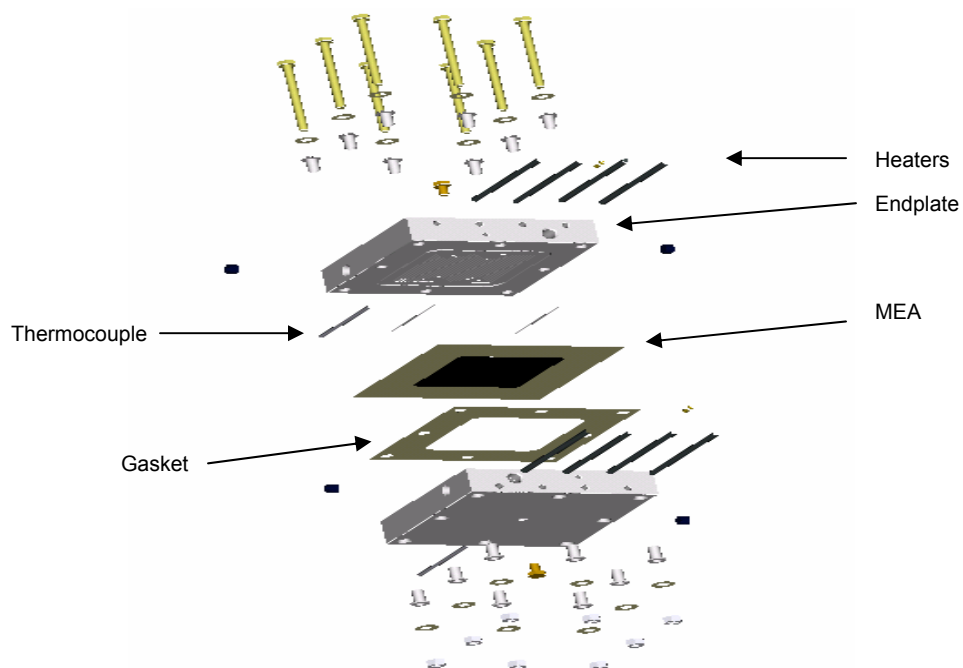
25 cm^2 Lynntech PEM fuel cell schematic, exploded view
